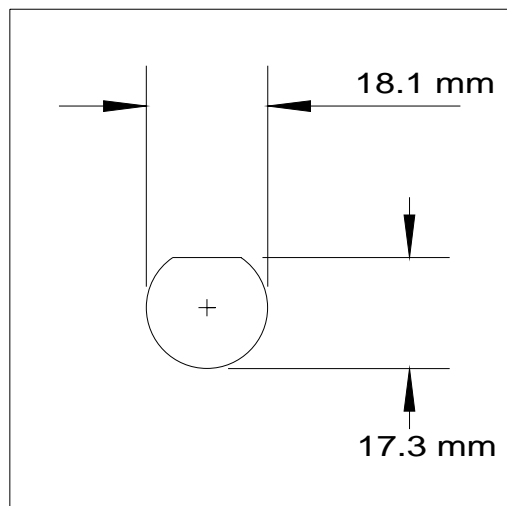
Panel Hole Dimensions for Fischer Panel-Mount Connector
